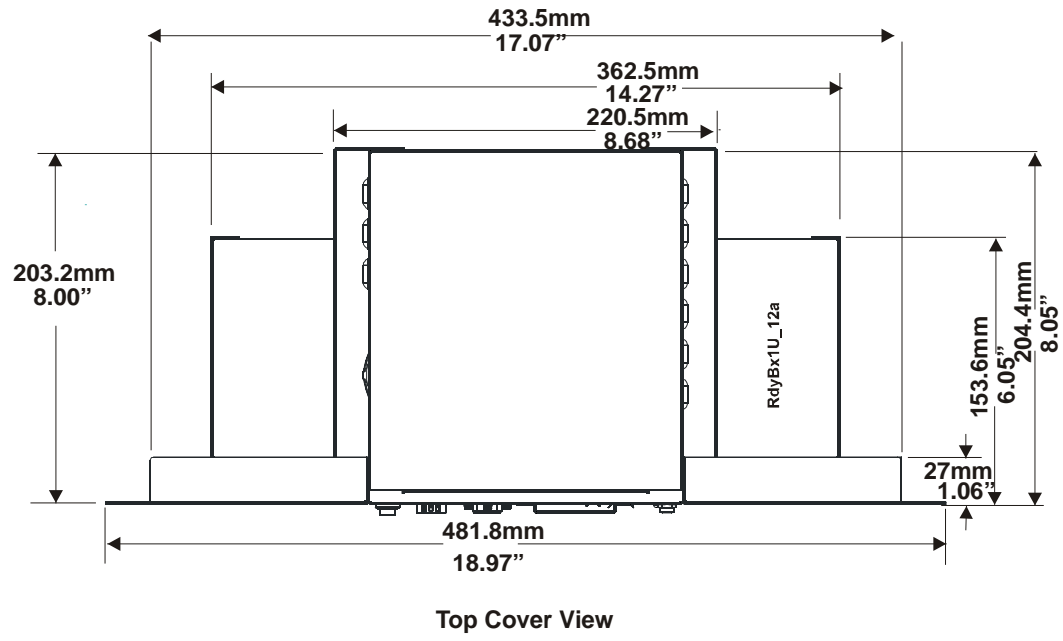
Optional Rack-Mounting Dimensions (Top View)
